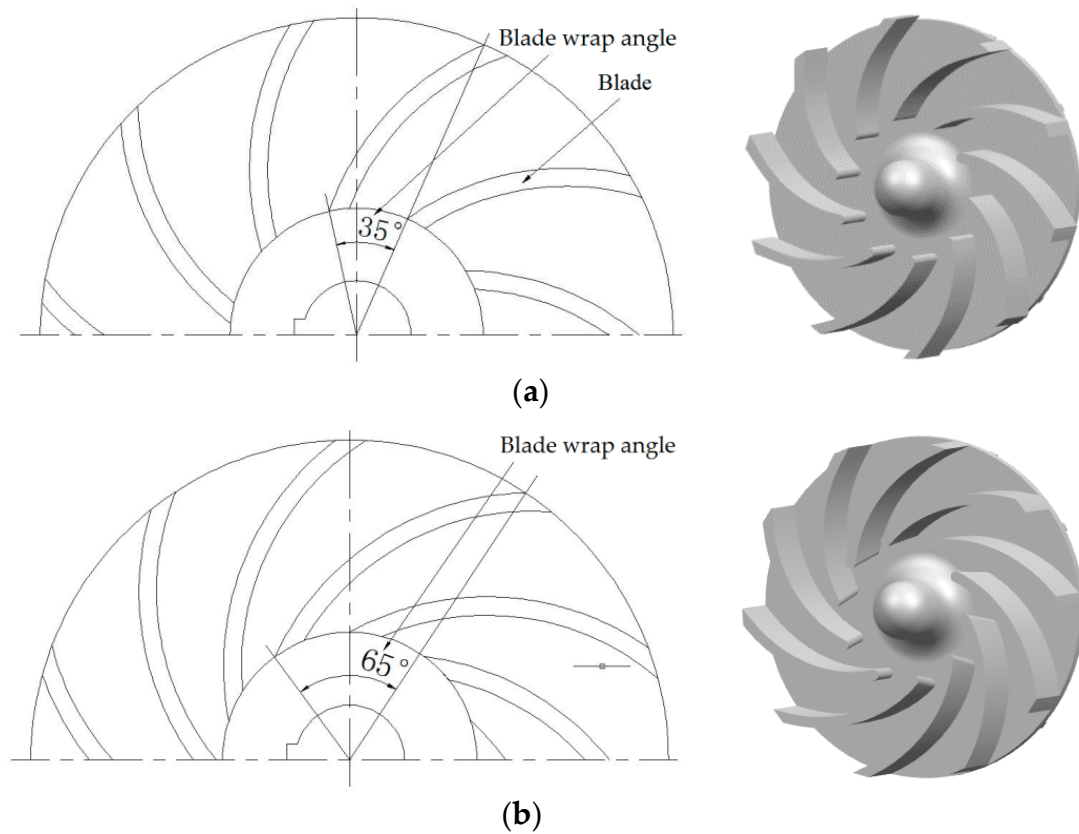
Blade wrap angle of impeller. (a) Impeller 1, (b) impeller 2.
